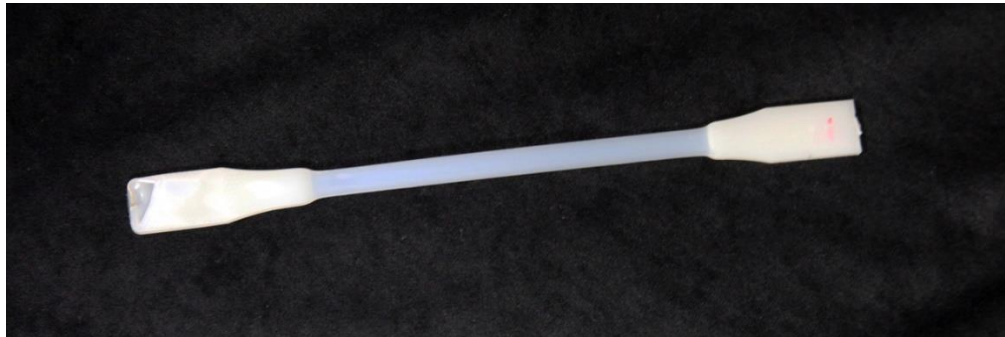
Photograph of Injection Molded Specimen (Leigh, Fracture Behavior in Laser Sintering, 2011)
